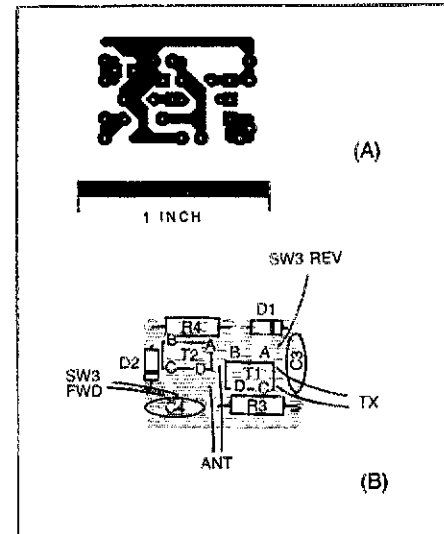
Circuit-board etching pattern (A) and parts-placement guide (B) for the SWR meter. The pattern is shown full-size from the foil side of the board. Black areas represent unetched copper foil. Parts are placed on the nonfoil side of the board; the shaded area represents an X-ray view of the copper pattern.
